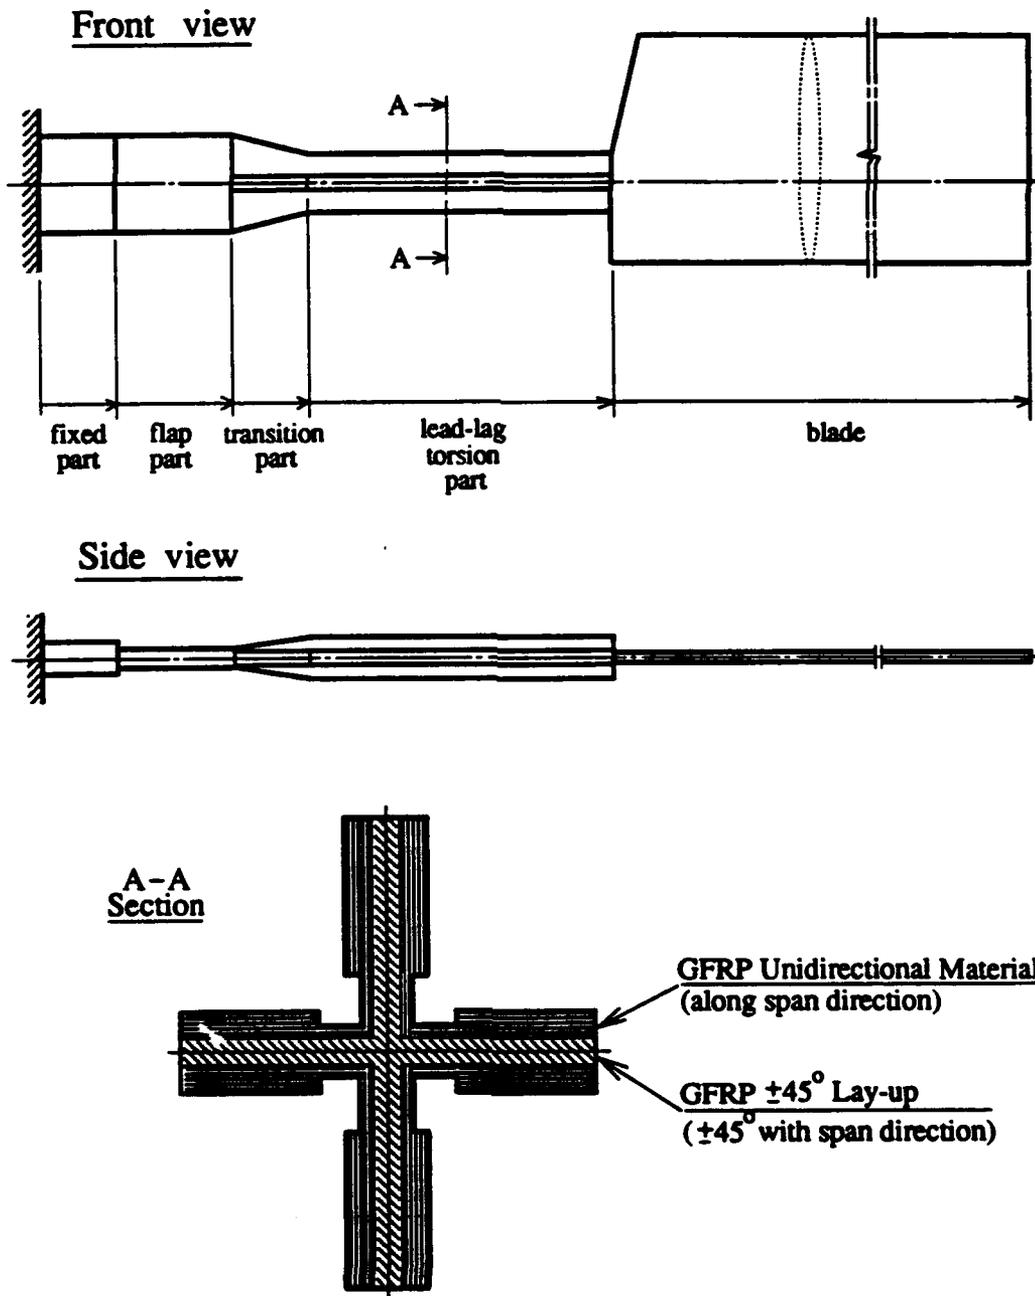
A sketch of the MBB bearingless tail rotor blade
